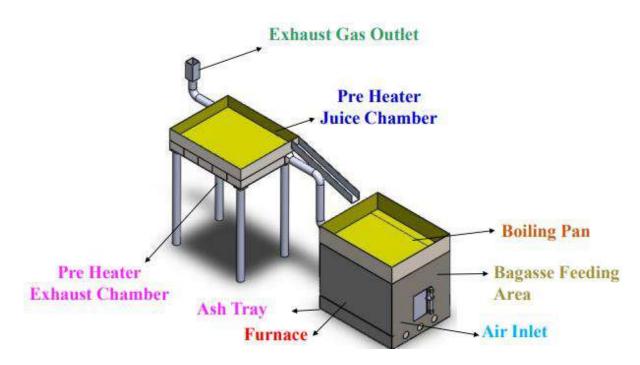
Overall CAD Design of Brown Sugar Making Machine
